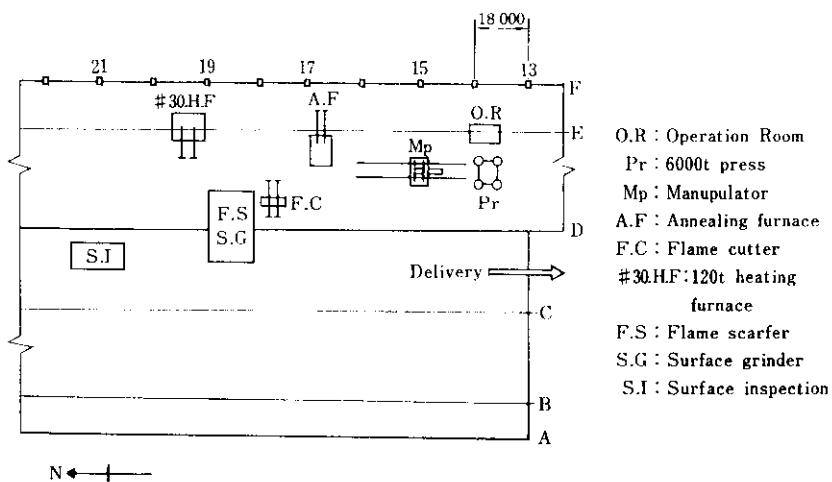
Layout of forging shop, concerning forging practice of the slab
